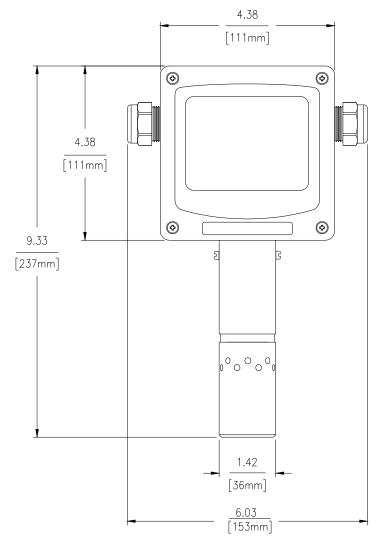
Duct Mount (Integral) Transmitter Dimensions
